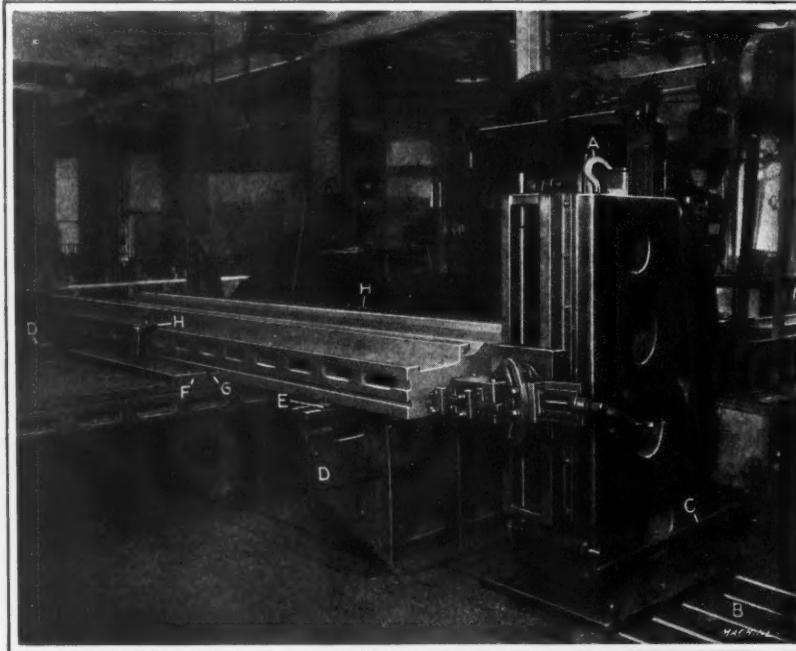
Use of an Independent Housing carrying a Side-head for planing the Ends of a Sectional Planer Table. Outriggers *D* are used to support the Overhanging Ends of the Work
